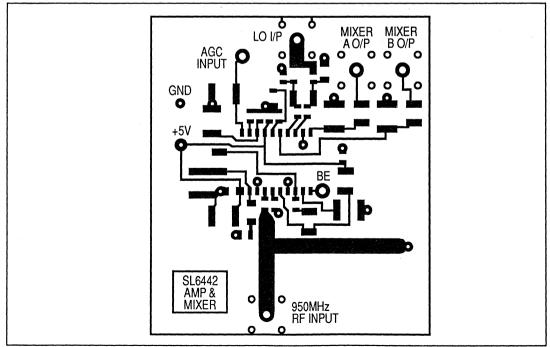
SL6442 demonstration board track. Scale=2 x full size
